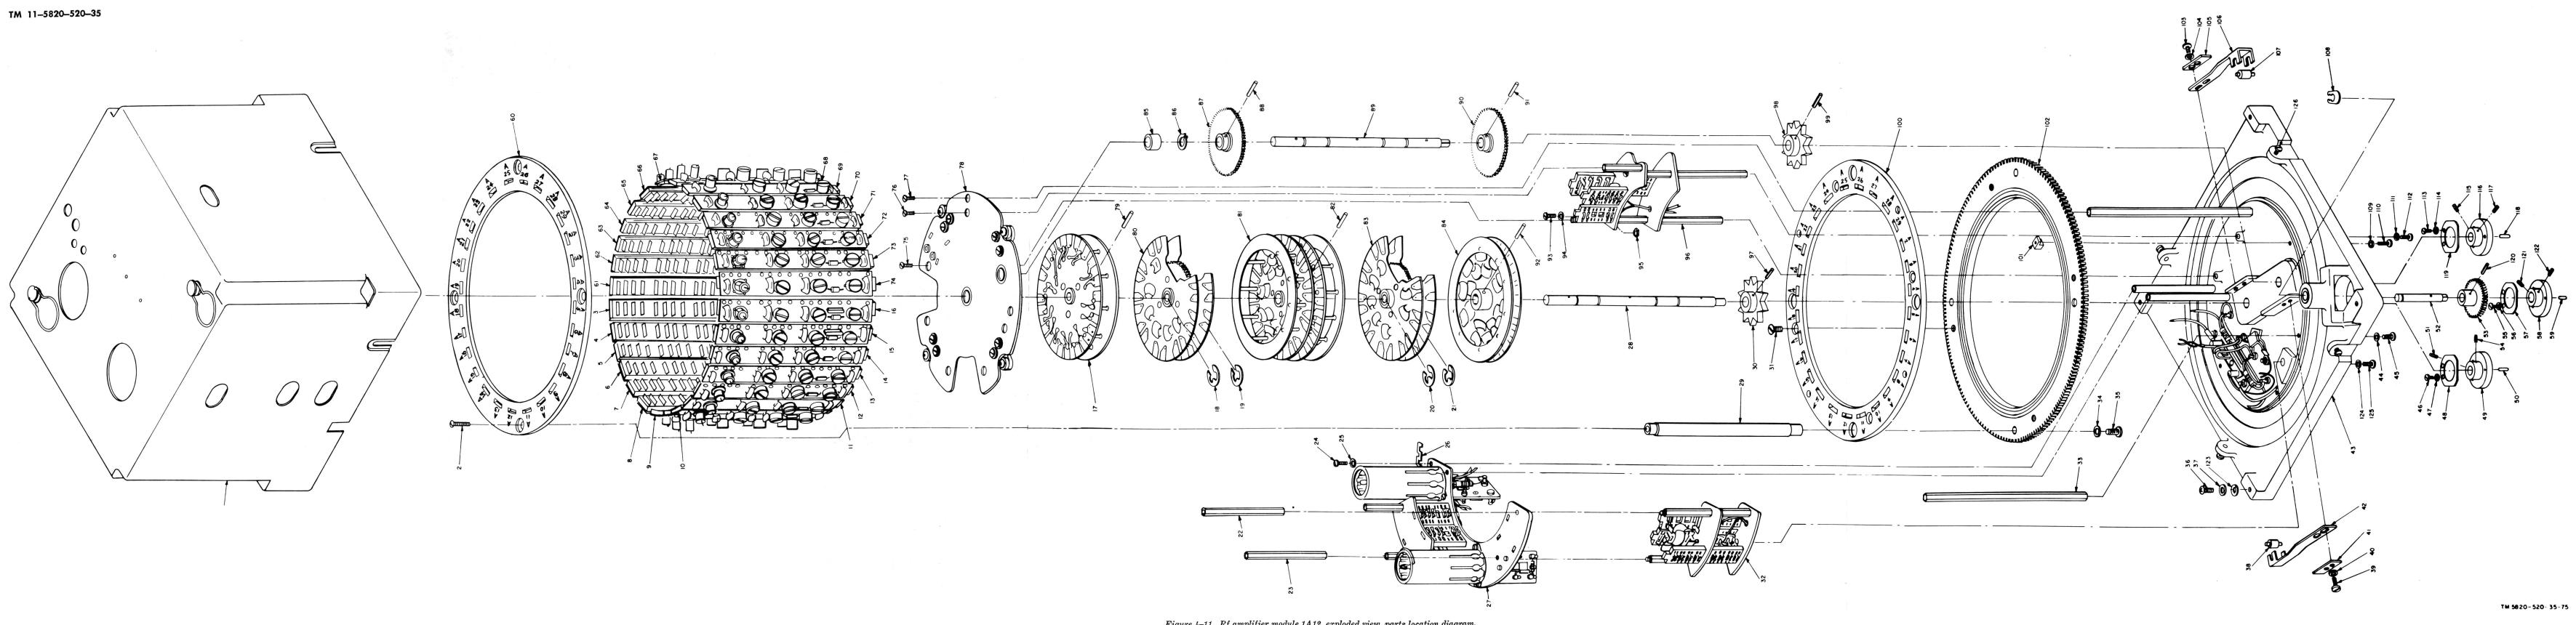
Rf amplifier module 1A12, exploded view, parts location diagram.
